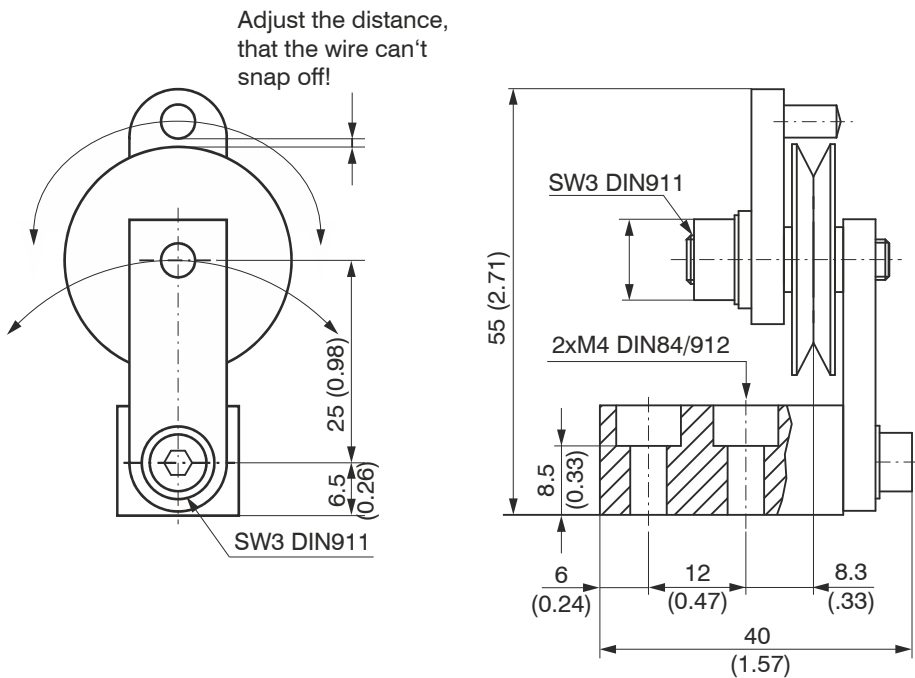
Guide pulley TR1 with mounting socket, dimensions in mm (inches), not to scale
